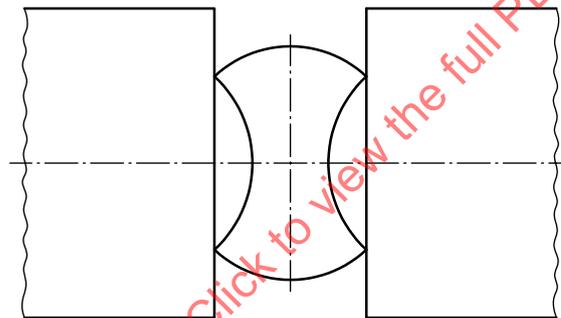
Chucking position of enlarger for testing twisting and angular deflection
